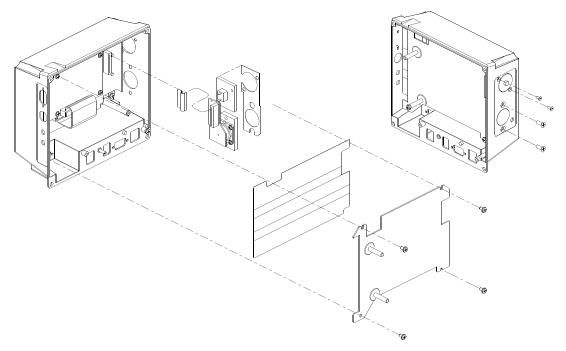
PCBA support plate and gas interface PCBA for option G
